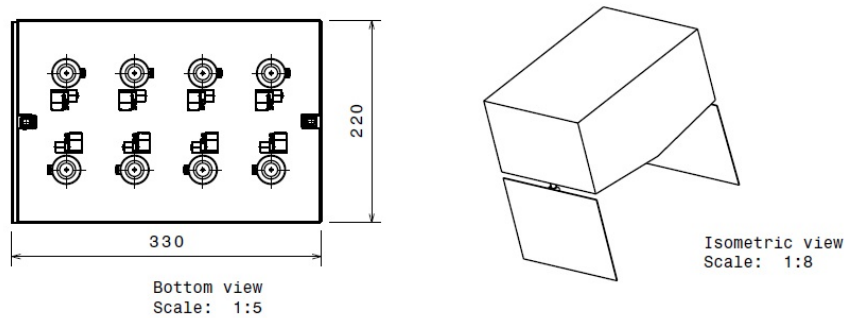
Technical drawings of the payload bay (dim. in mm)
